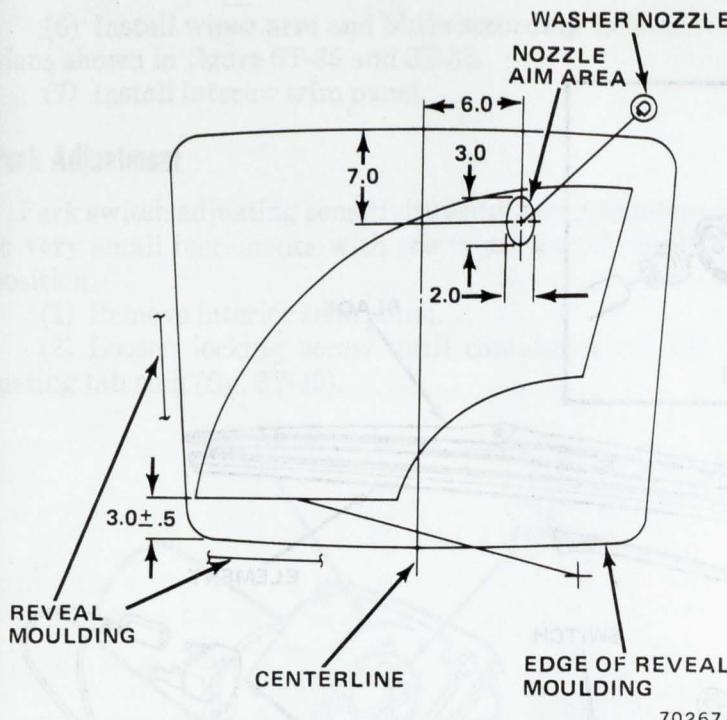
T-35 Wiper Arm Park and Washer Nozzle Aiming Location Measurement (Inches)—Pacer Hatchback
